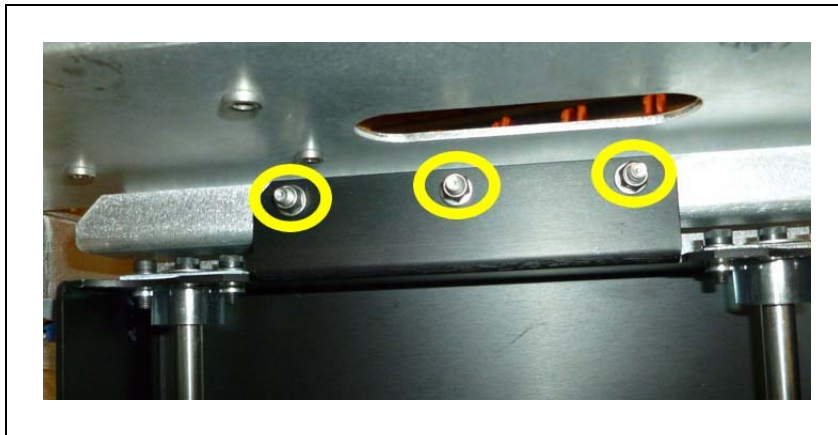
Mounting Studs and Nuts at top of Drive Assembly
